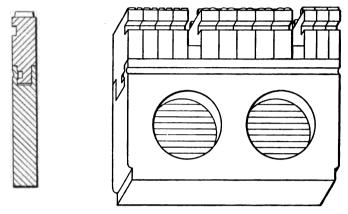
The Oddur type-bar machine; grooved slug for short type. Scale: twice full size.
